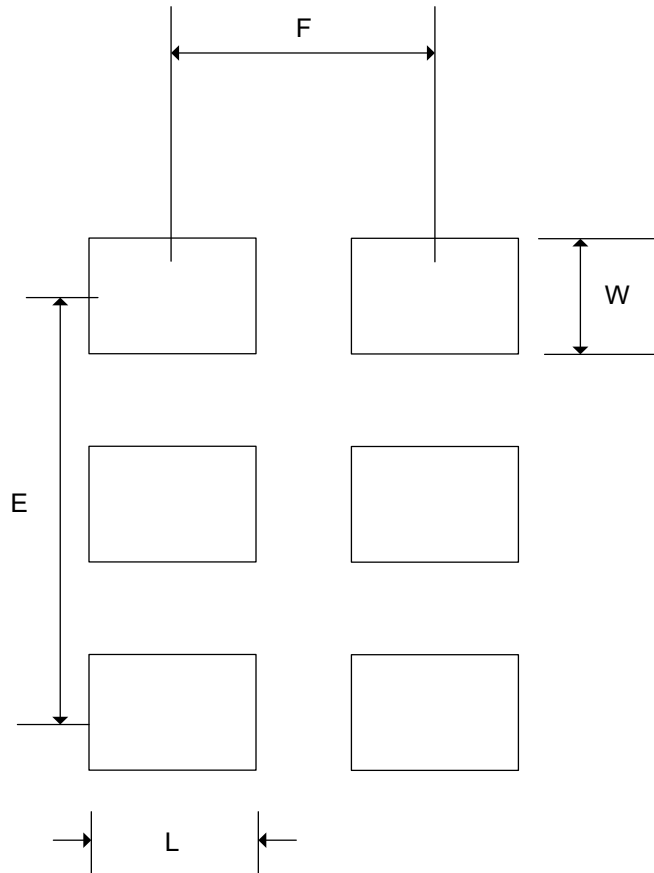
MS1130 Packaging Land Pattern Drawing (2.5X2.0 mm)
